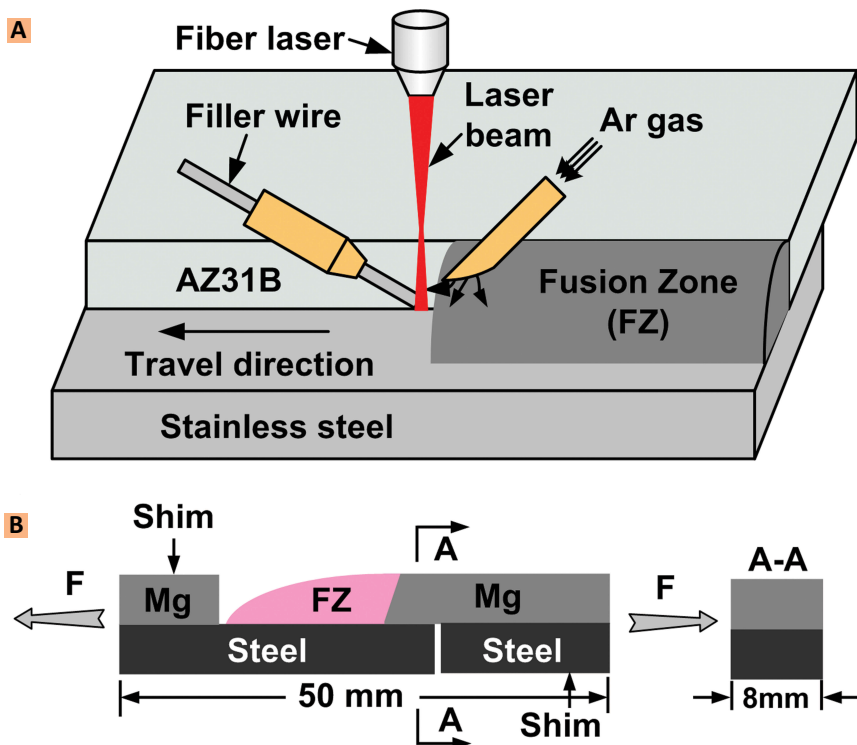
Schematic of the following: A — Laser welding-brazing process; B — 8-mm-wide tensile shear test specimen.
